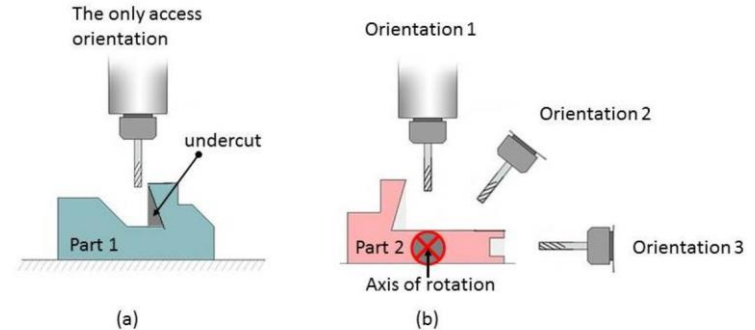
Milling and Drilling Machine (3-Axis and 4-Axis) [44]
